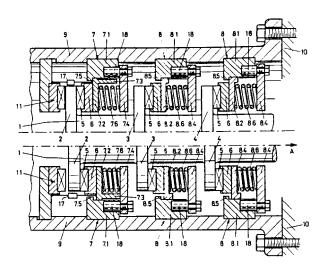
Multiple thrust bearing principle. (Source: MAAG Gear Company.)
